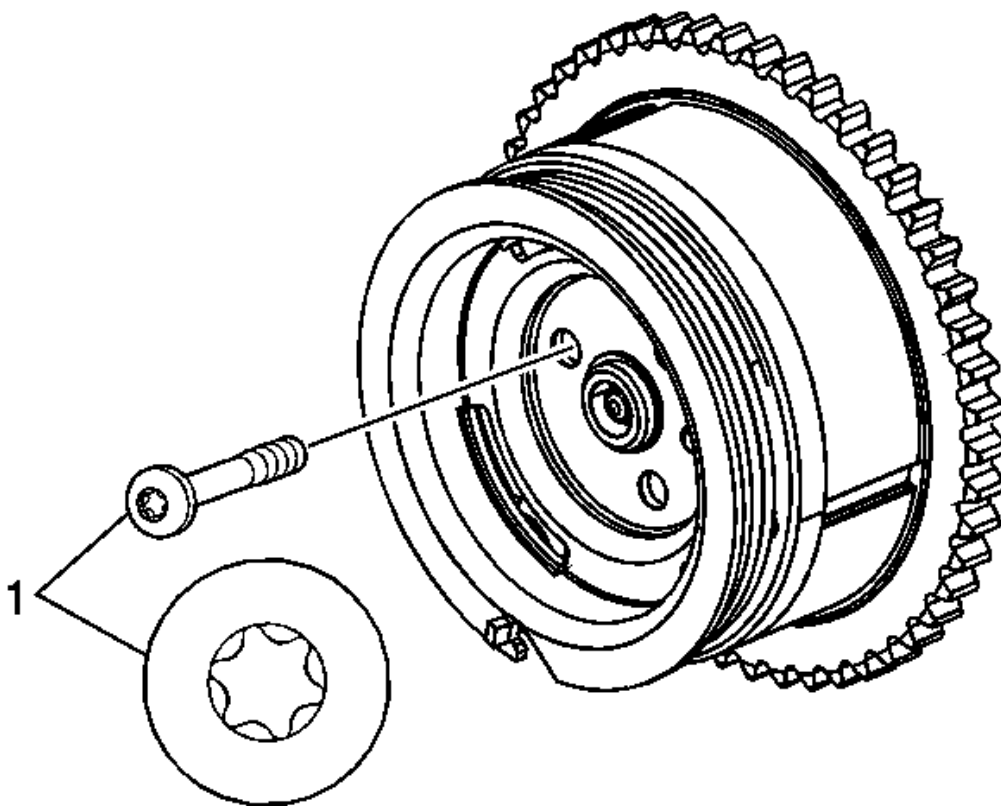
Identifying Camshaft Position Actuator & Fasteners
